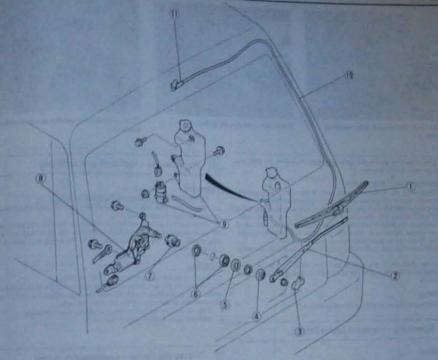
Exploded view of the tailgate wiper and washer system components - Estate models (Secs 23 and 25)
